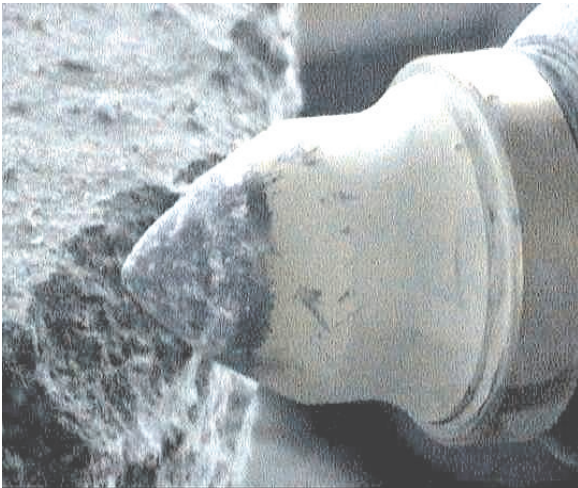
The view of the blade of the rotary-tangential tool mounted in the rolling bearing holder after the cutting trials along the length of ca. 2500 m (Kotwica 2005)
